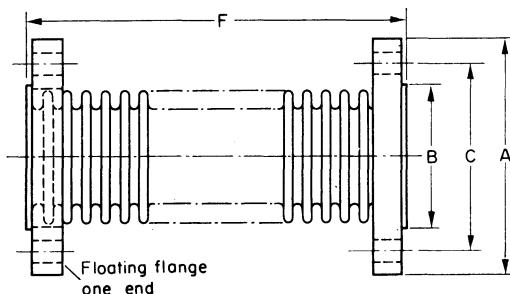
Dimensions of flexible vacuum connectors supplied by N.R.C.⁹¹² (Table 5.3)
